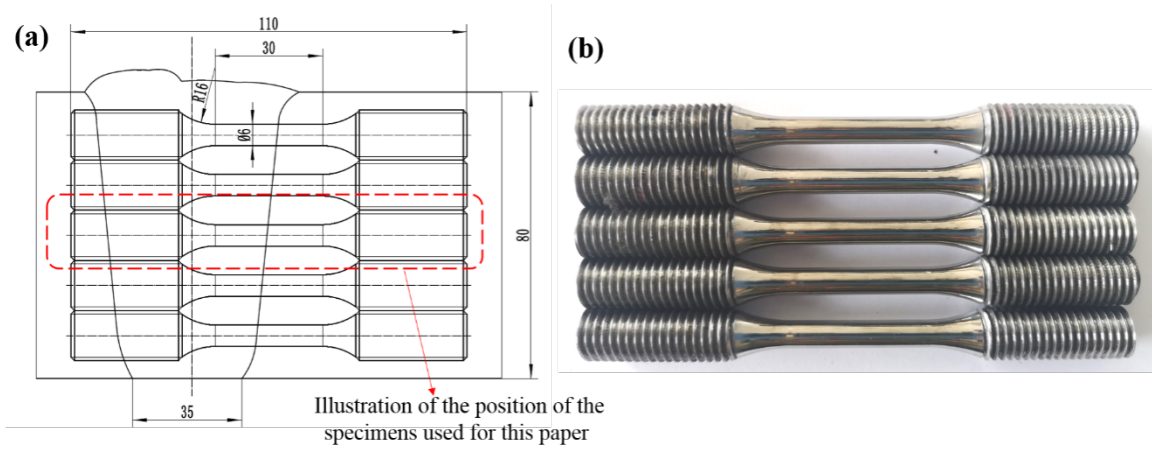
(a) Illustration of the position, relative to the weld, of the CF specimens and of their geometry; (b) The machined specimens.
